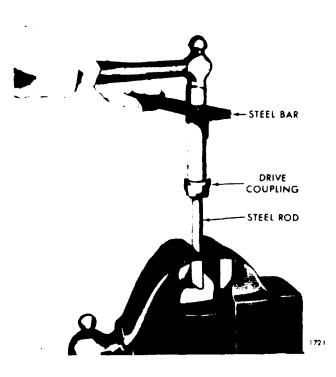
F-6. Removing Pump Drive Coupling with Tool J 1930
